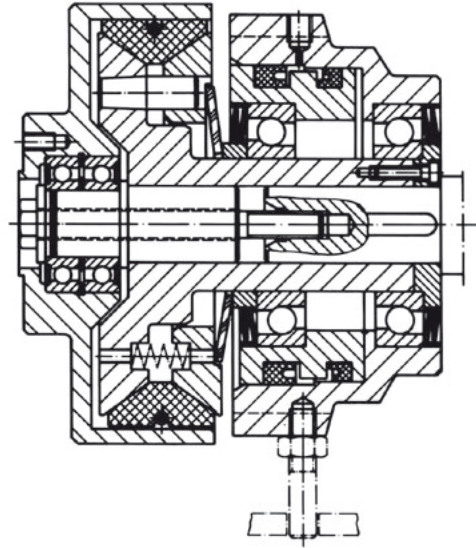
Conax®-Friction Clutch type CHFR hydraulically actuated for universal joint
